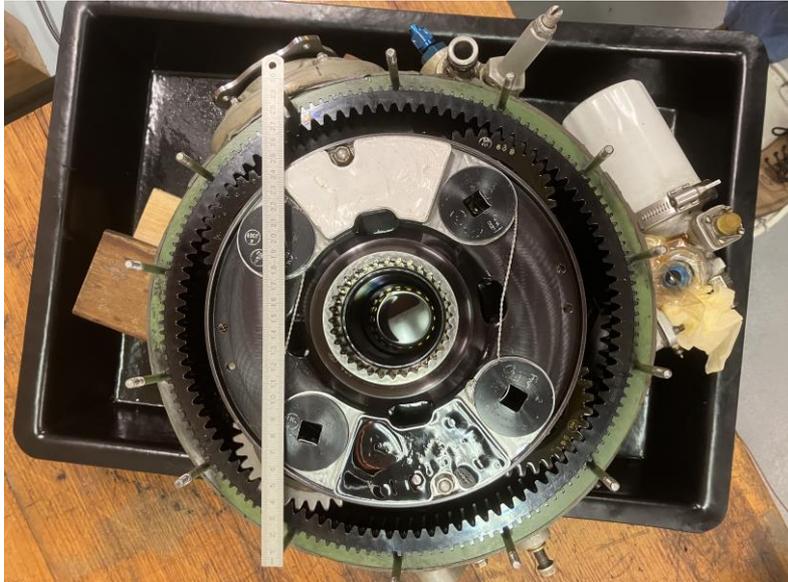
Sensor and balance weight mounted on planet gear carrier.
